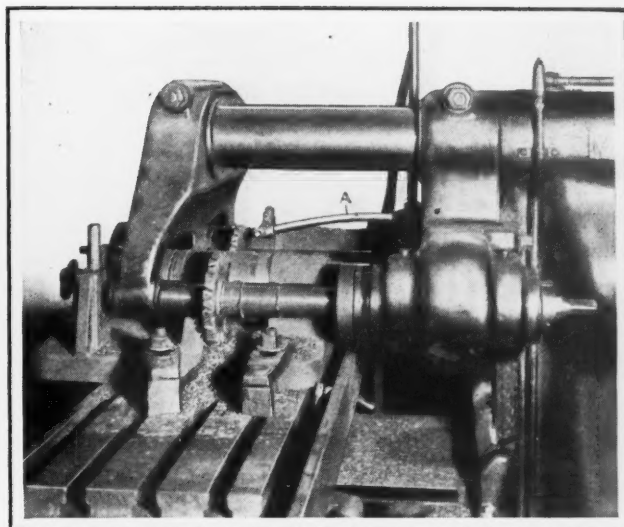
Milling Both Ports in an Inner and an Outer Valve Sleeve
